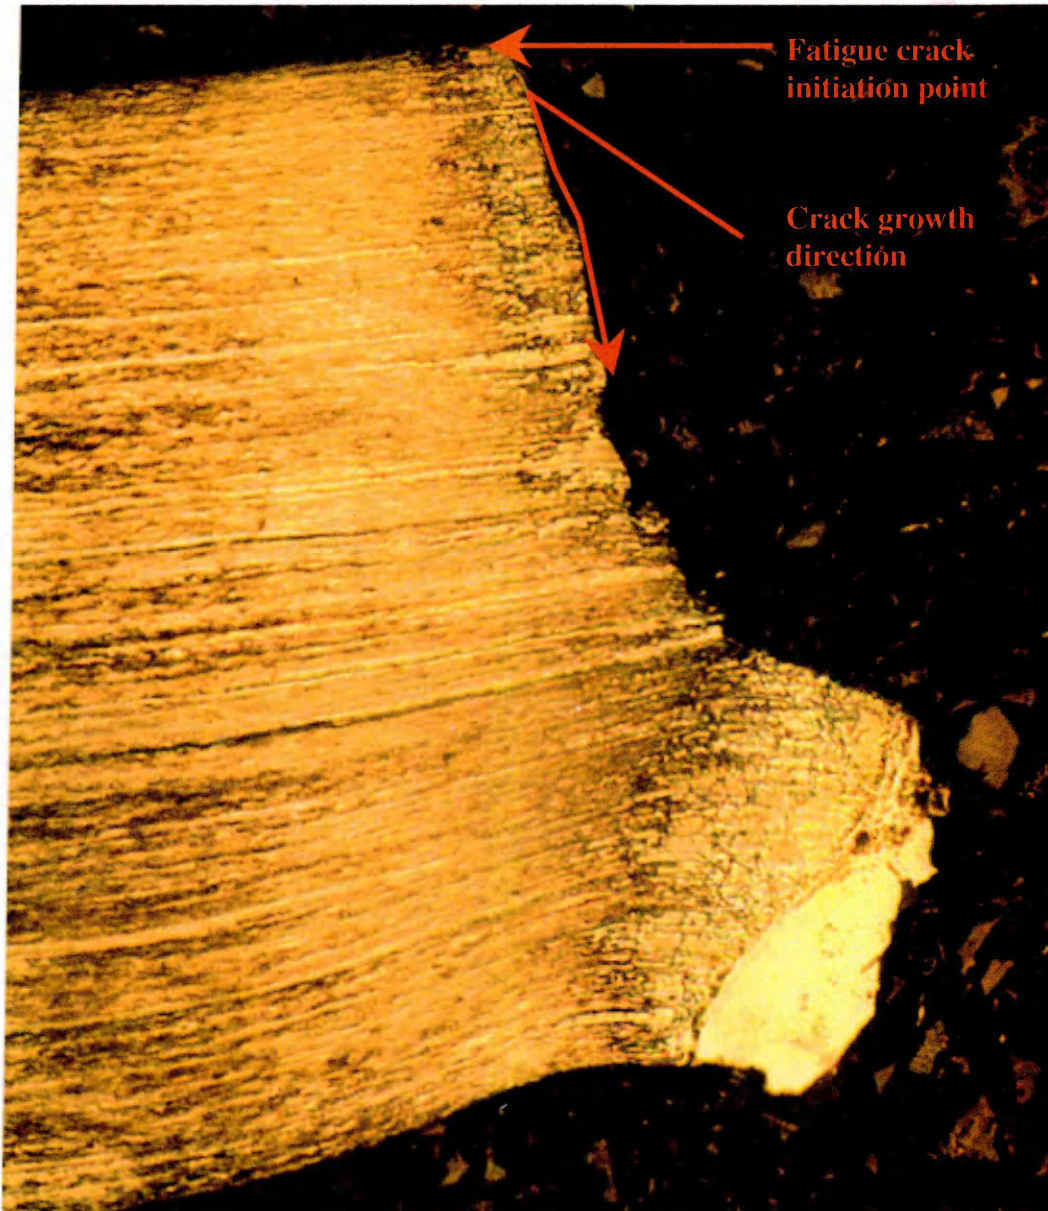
Change in Fatigue crack propagation direction from the HAZ into the laser weld bead
